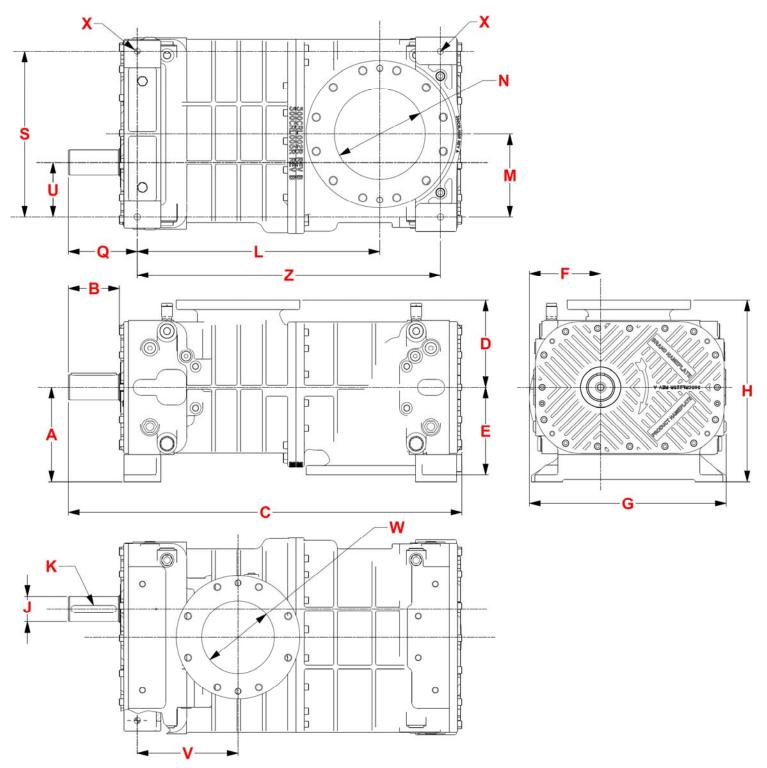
TOP DISCHARGE OUTLINE DIMENSIONS
